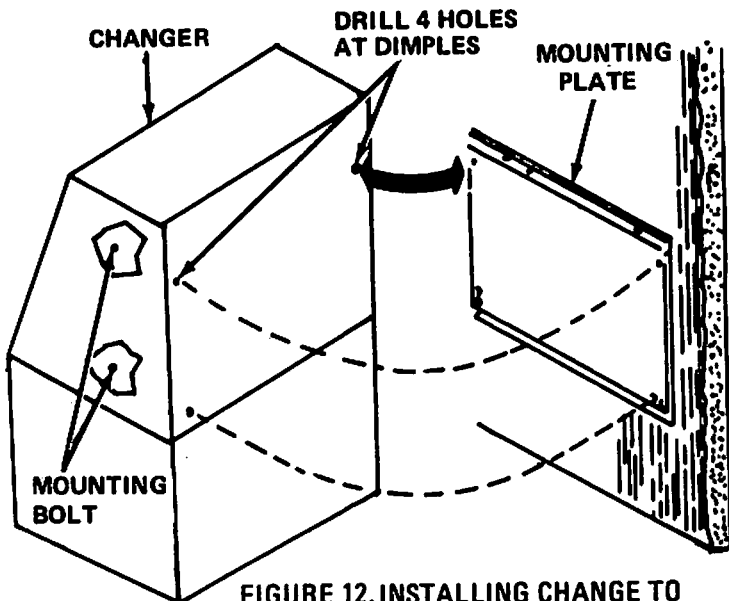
INSTALLING CHANGER TO WALL MOUNTING PLATE
